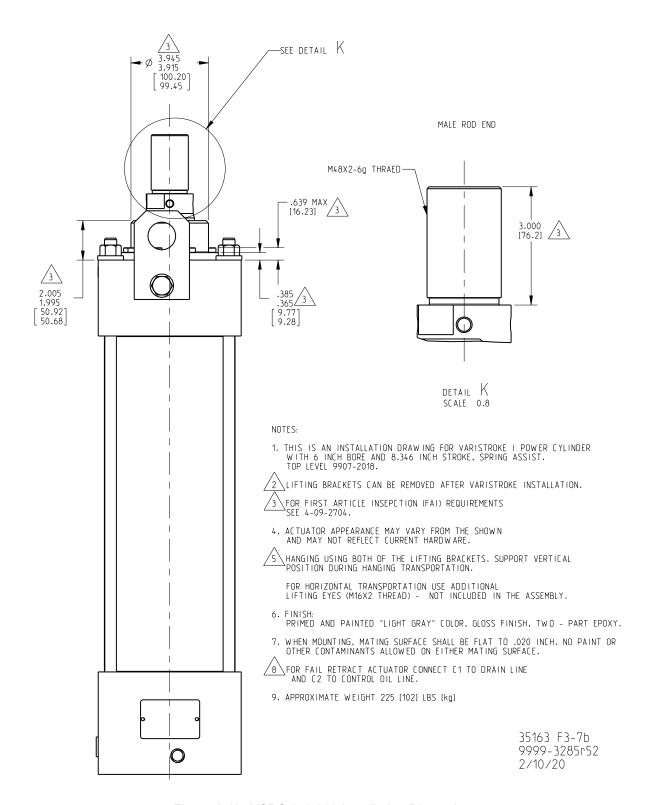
VSPC 6x8.346 Installation Dimensions
